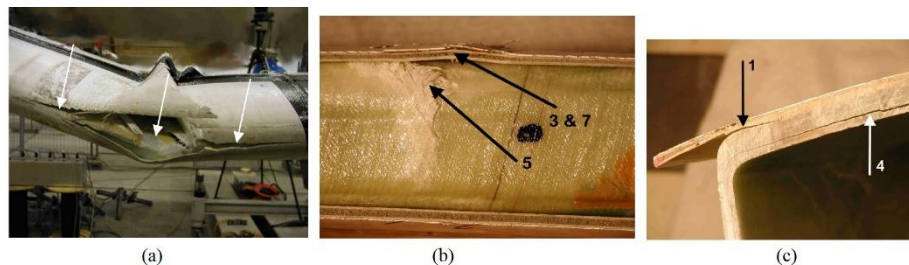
(a) Adhesive joint failure between skins at the leading edge (Damage type 2), (b) sandwich panel face/core debonding (Damage types 3), laminate failure in compression (Damage types 5) and gel-coat/skin debonding (Damage types 7), (c) Debonding of the main spar flange (Damage type 1) & delamination in the laminated structure (Damage type 4) [22]
